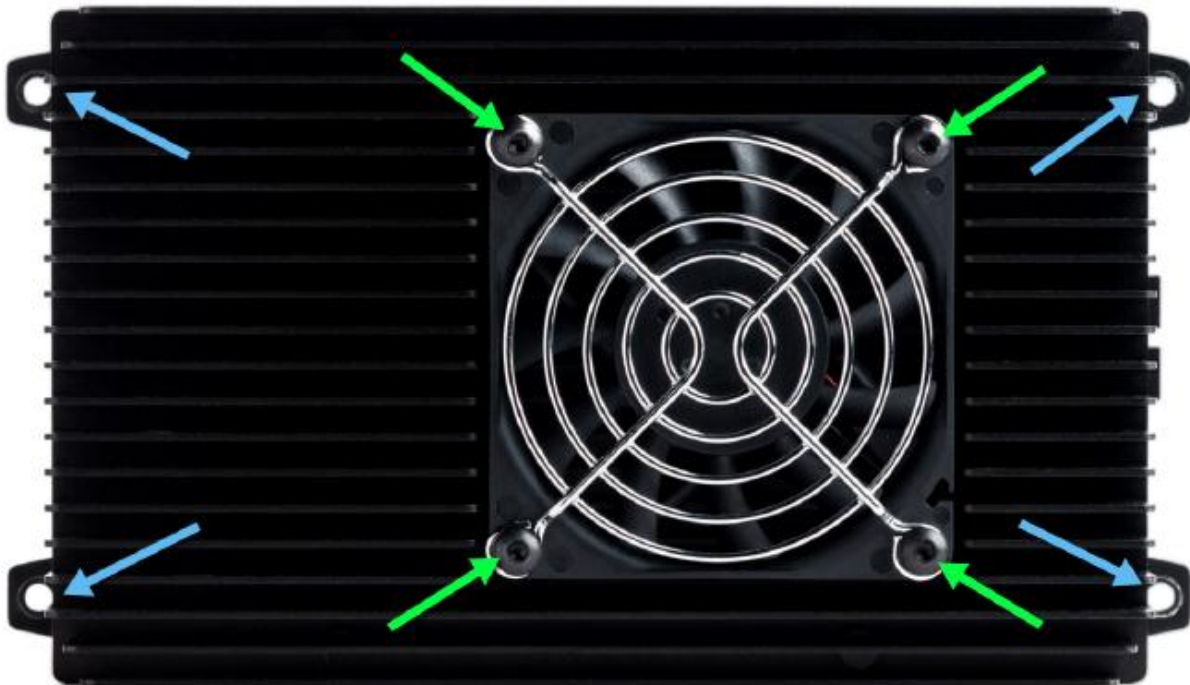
50-Hr Maintenance Assembly Check Diagram Part 1
